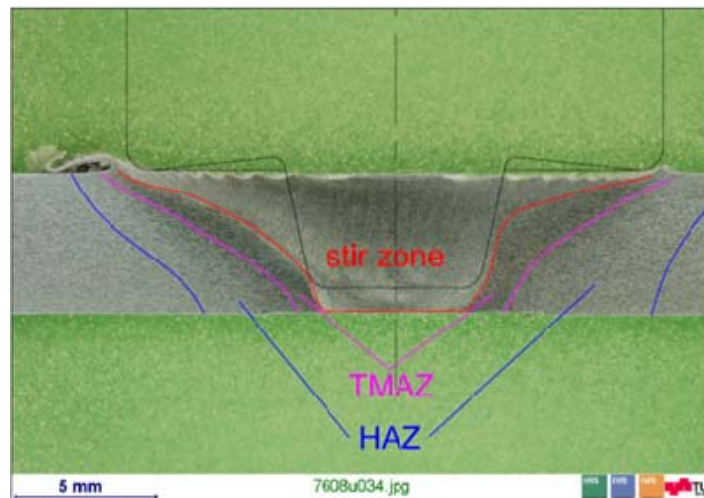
Different zones of an aluminium friction stir weld
